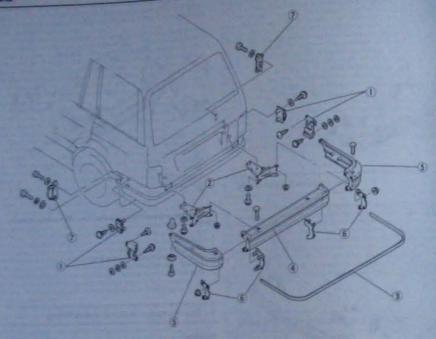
Exploded view of the rear bumper and fittings pre-October 1989 Estate models (Sec 7)
